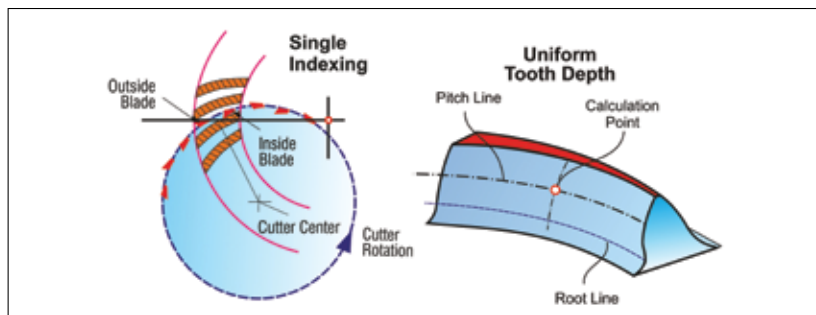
Face milling process combined with uniform (non-tapered) tooth depth.
